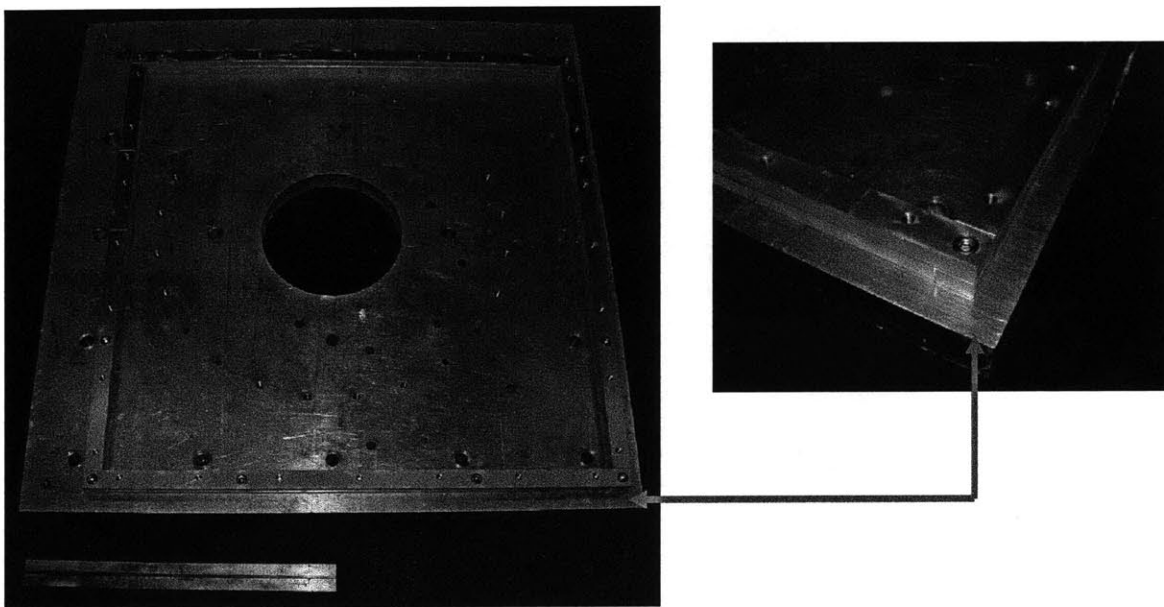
Rigid Test Frame with Corner Call-Out to Illustrate Assembly
